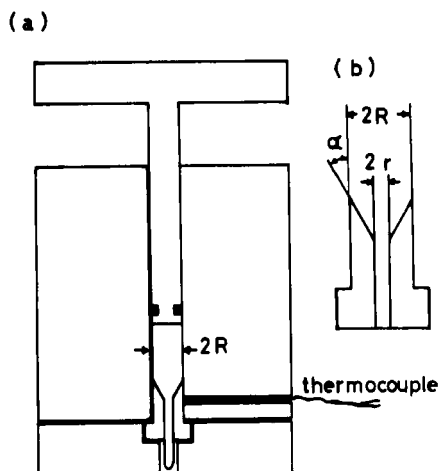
Longitudinal section of (a) extrusion device, and (b) die.
